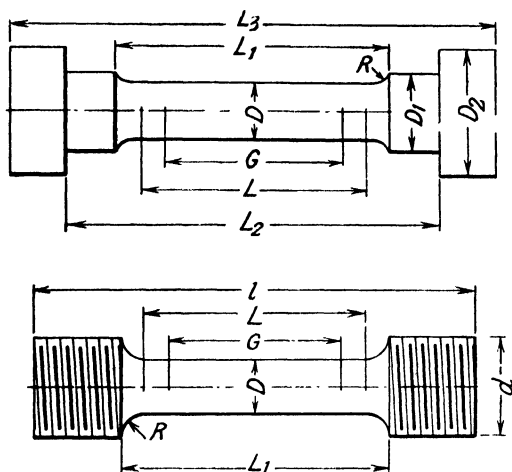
FORMS OF CYLINDRICAL TEST PIECES
